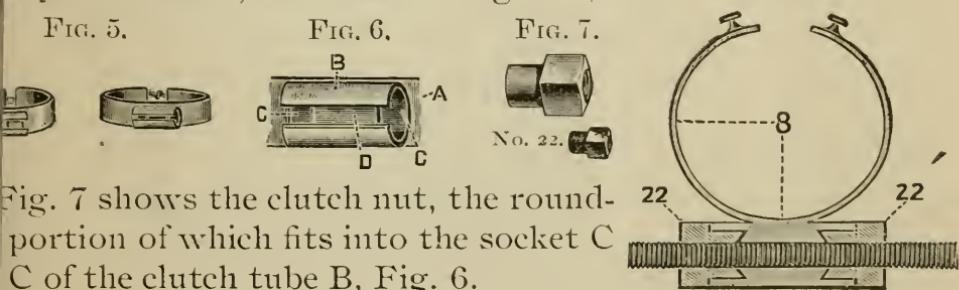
shows the clutch nut, the round portion of which fits into the socket C of the clutch tube B, Fig. 6.
